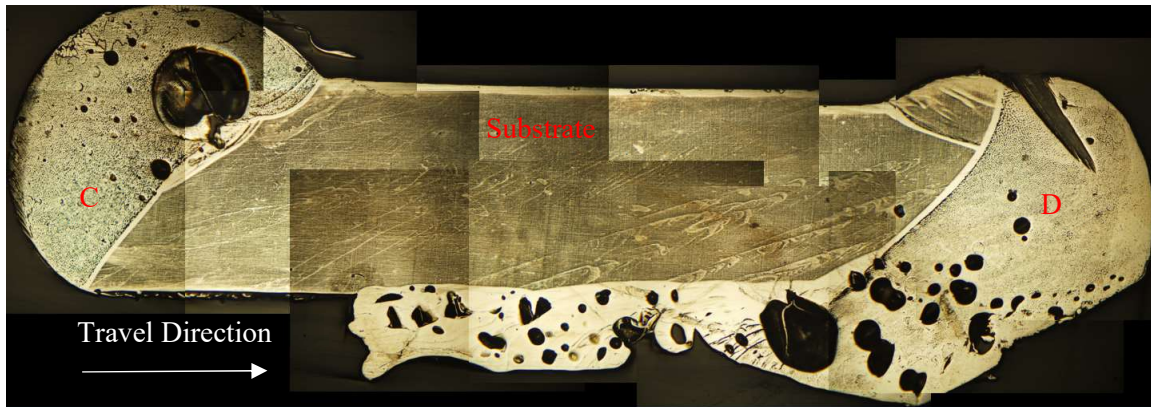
Welds C and D deposited on single crystal substrate. Weld C is a spot weld with molten material deposited directly onto substrate. Weld D is a weld traveling from left to right.
